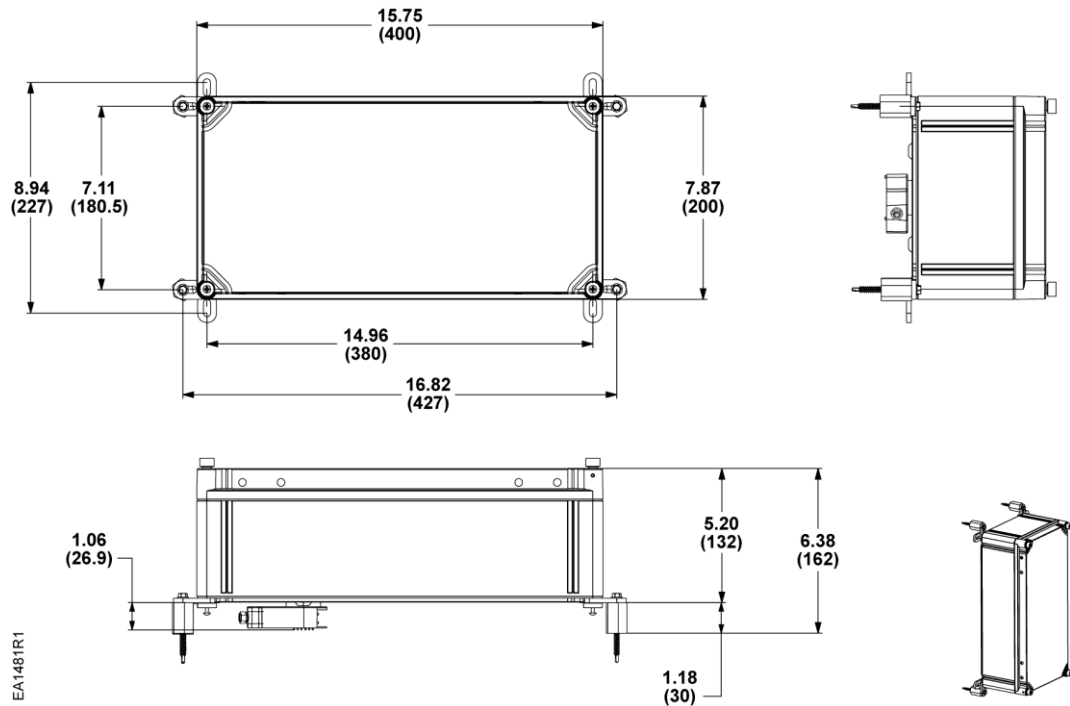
Dimensions of the ASK75.7U Weather Shield in Inches (Millimeters).
